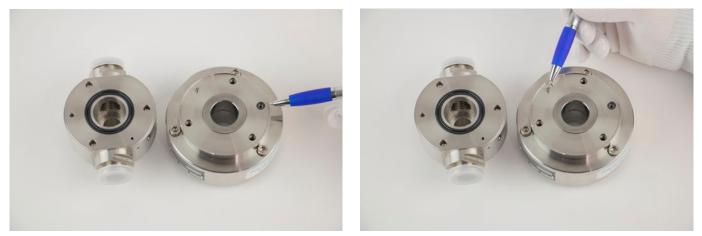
C O-Ring and Indexing Pin Positions
